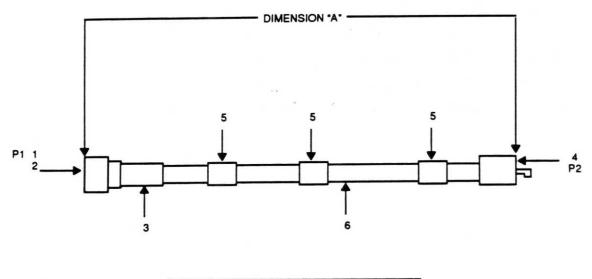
Cable Assembly - Accelerometer to DAU (29105600 through 29105605)
